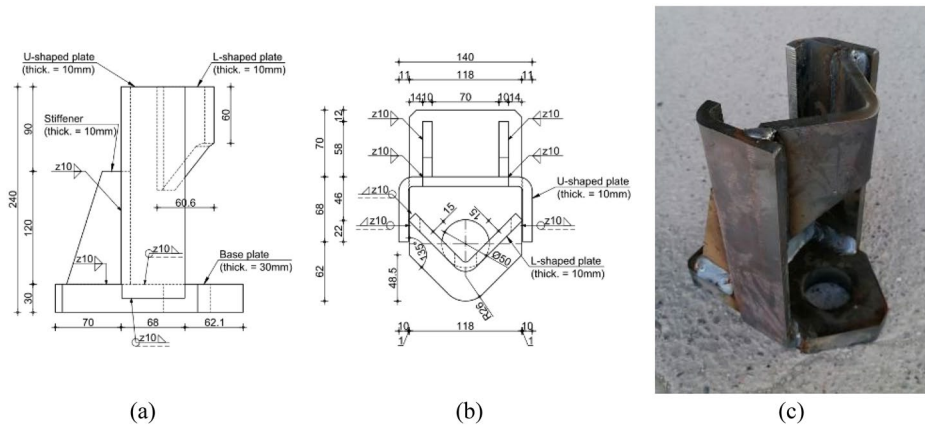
Schematic of the steel shoe (dimensions in [mm]): (a) side view; (b) top view; (c) actual view. Welding symbols according to EN ISO 2553:2019
